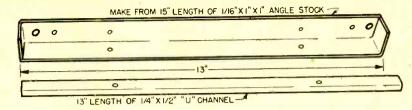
Drawing at left shows construction of the metal parts needed for the lamp assembly.
